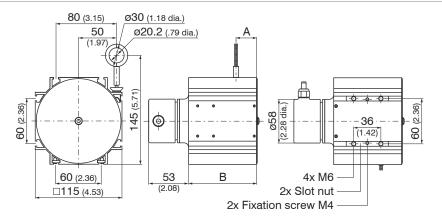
Dimensional drawing ... - FD115 - HTL/TTL, dimensions in mm (inches), not to scale
